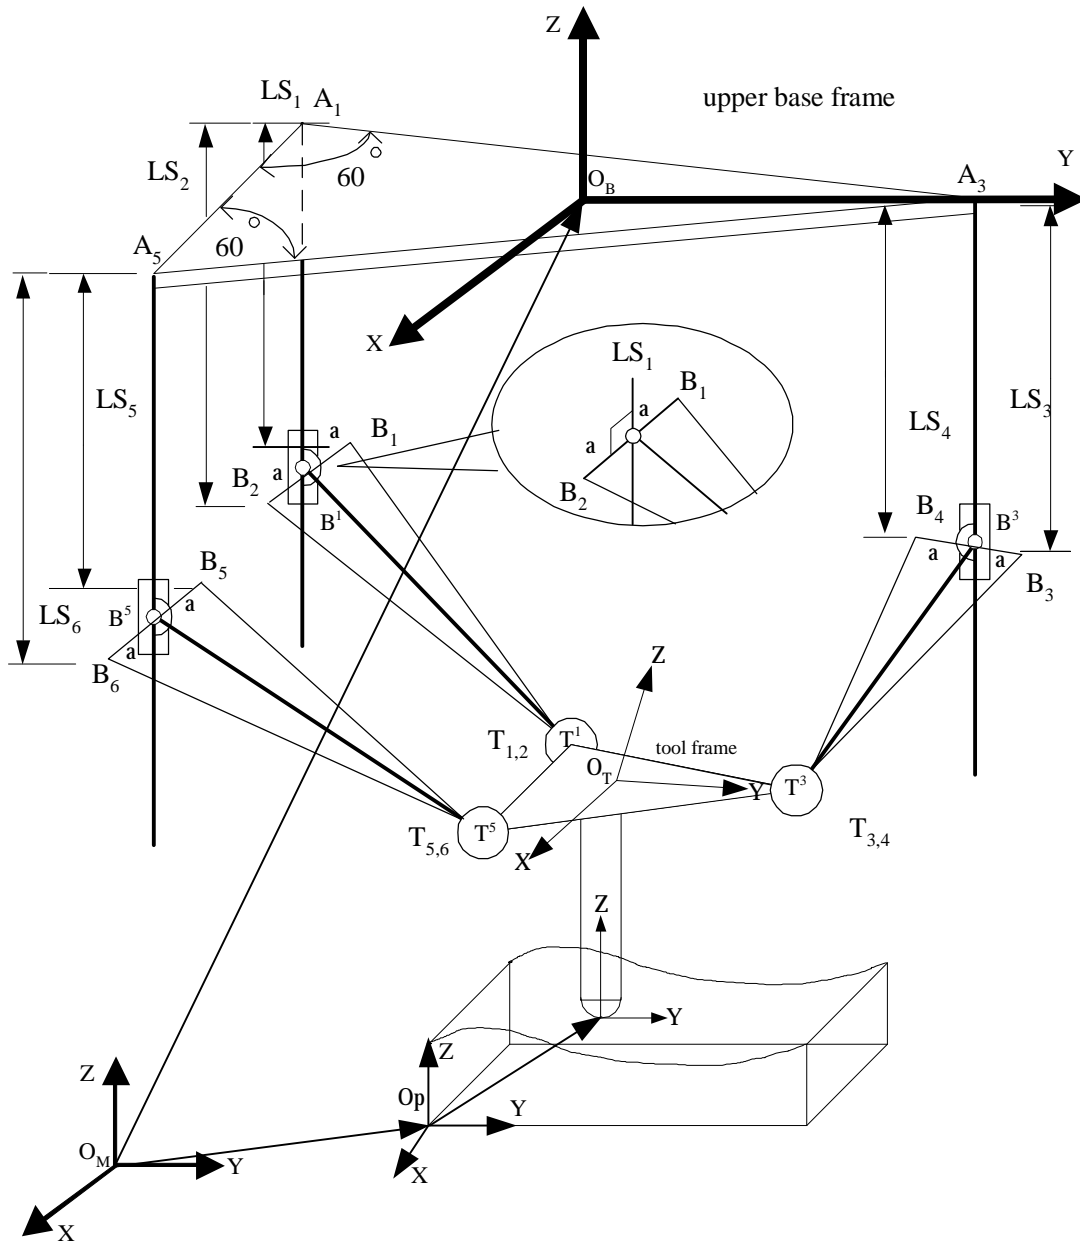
The schematic diagram shows the coordinate system and the equivalent component concept of the hybrid machine tool.
